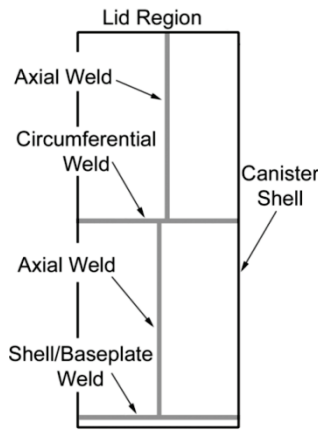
Holtec HI-STORM Canister Weld Schematics
